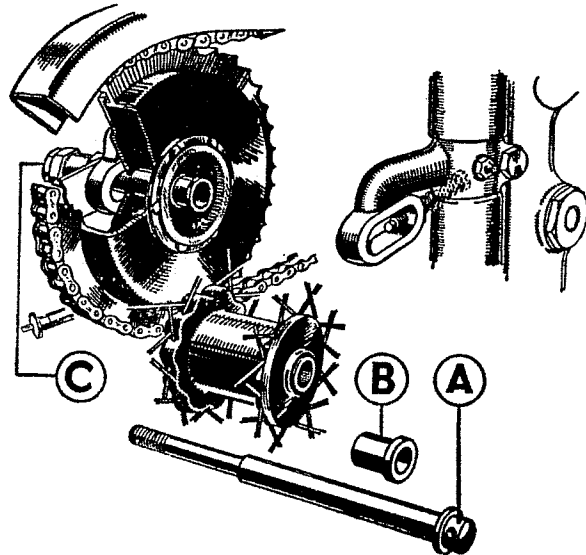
(c) Rear Wheel Removal (Spring Frame)
